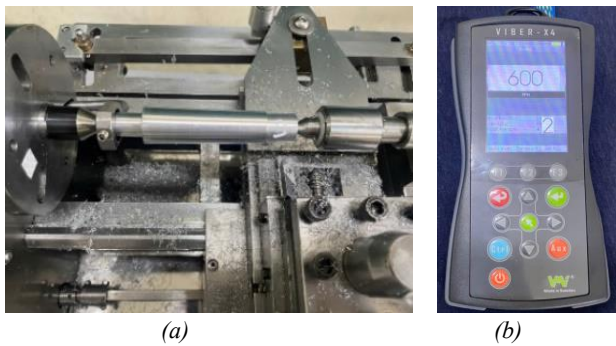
Workpiece setup diagram (a), spindle speed inspection (b)
